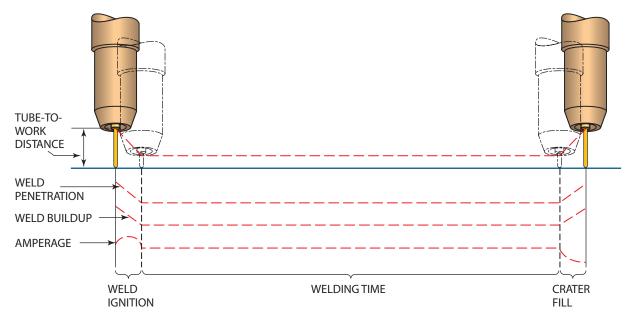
Using the changing tube-to-work distance to improve both the starting and stopping points of a weld.
